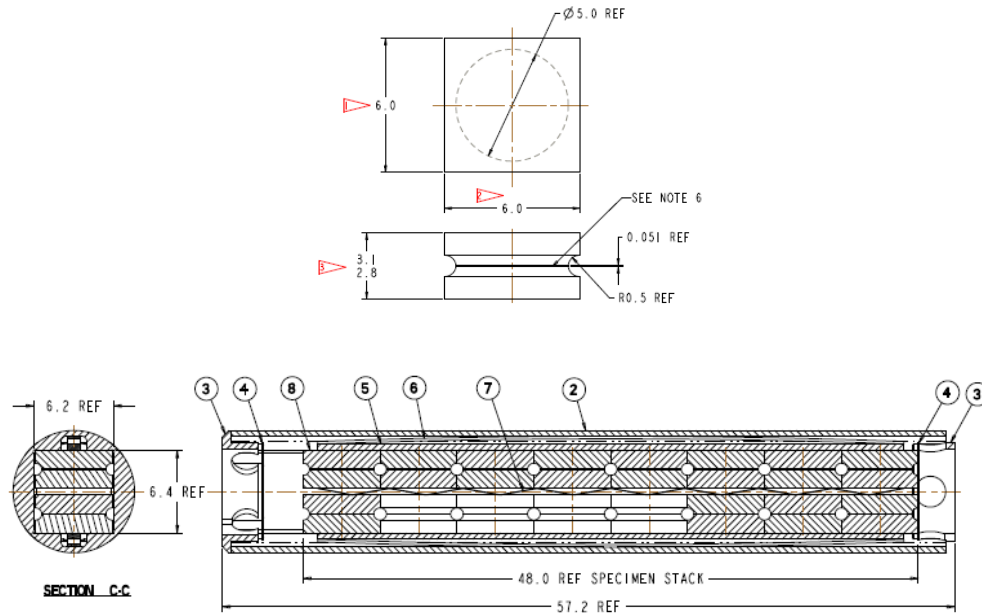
Specimen Details and Capsule Layout for the Torsion Joint Capsules. Dimensions are in mm.
